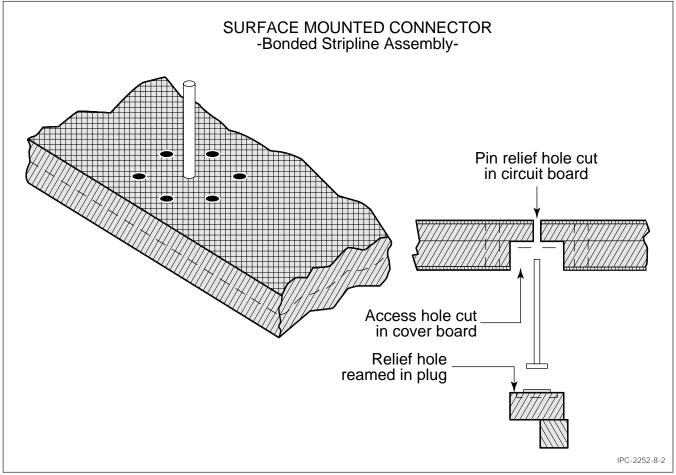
Alternative Mounting Method, Showing the Attachment of the Connector's Pin
